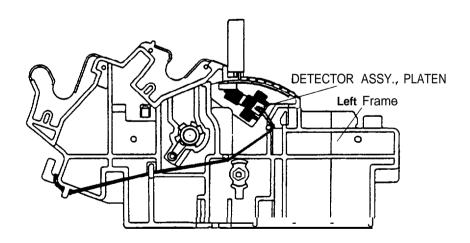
Removing the DETECTOR ASSY., PLATEN
